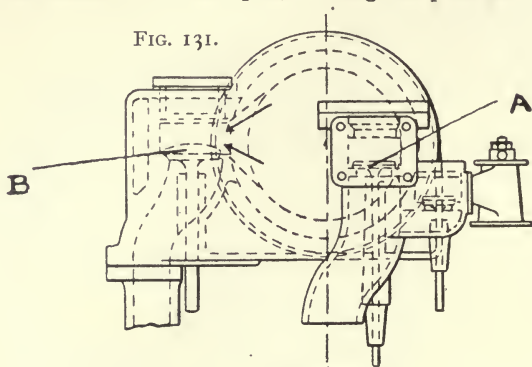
Crossley Otto Scavenging Engine (end elevation).
